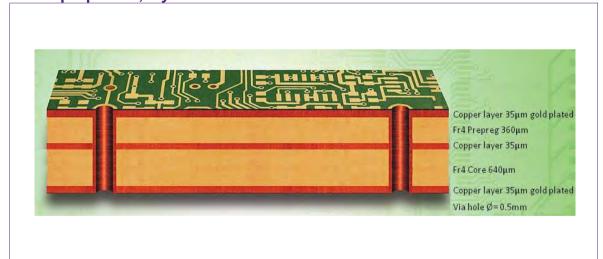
PCB layers used for Evaluation Boards in Starter kit
